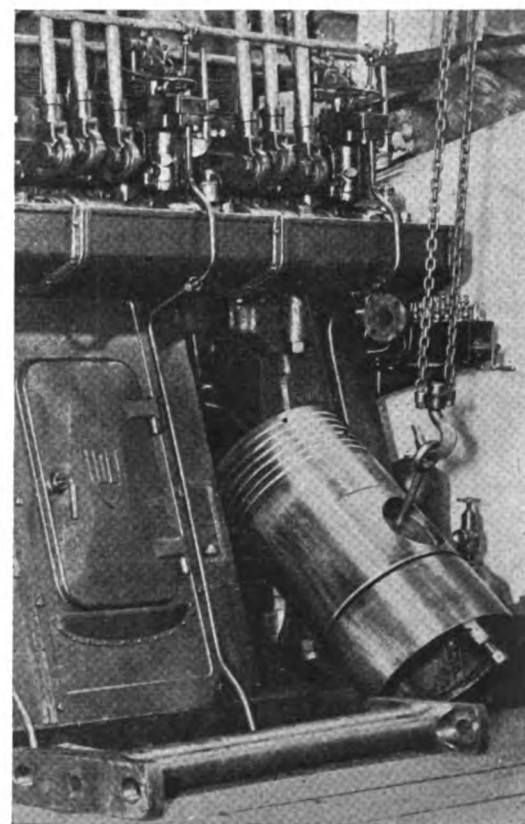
Showing the upper and lower end of the connecting rod and the method of taking out the piston without touching the valve gear on the cylinder head.
